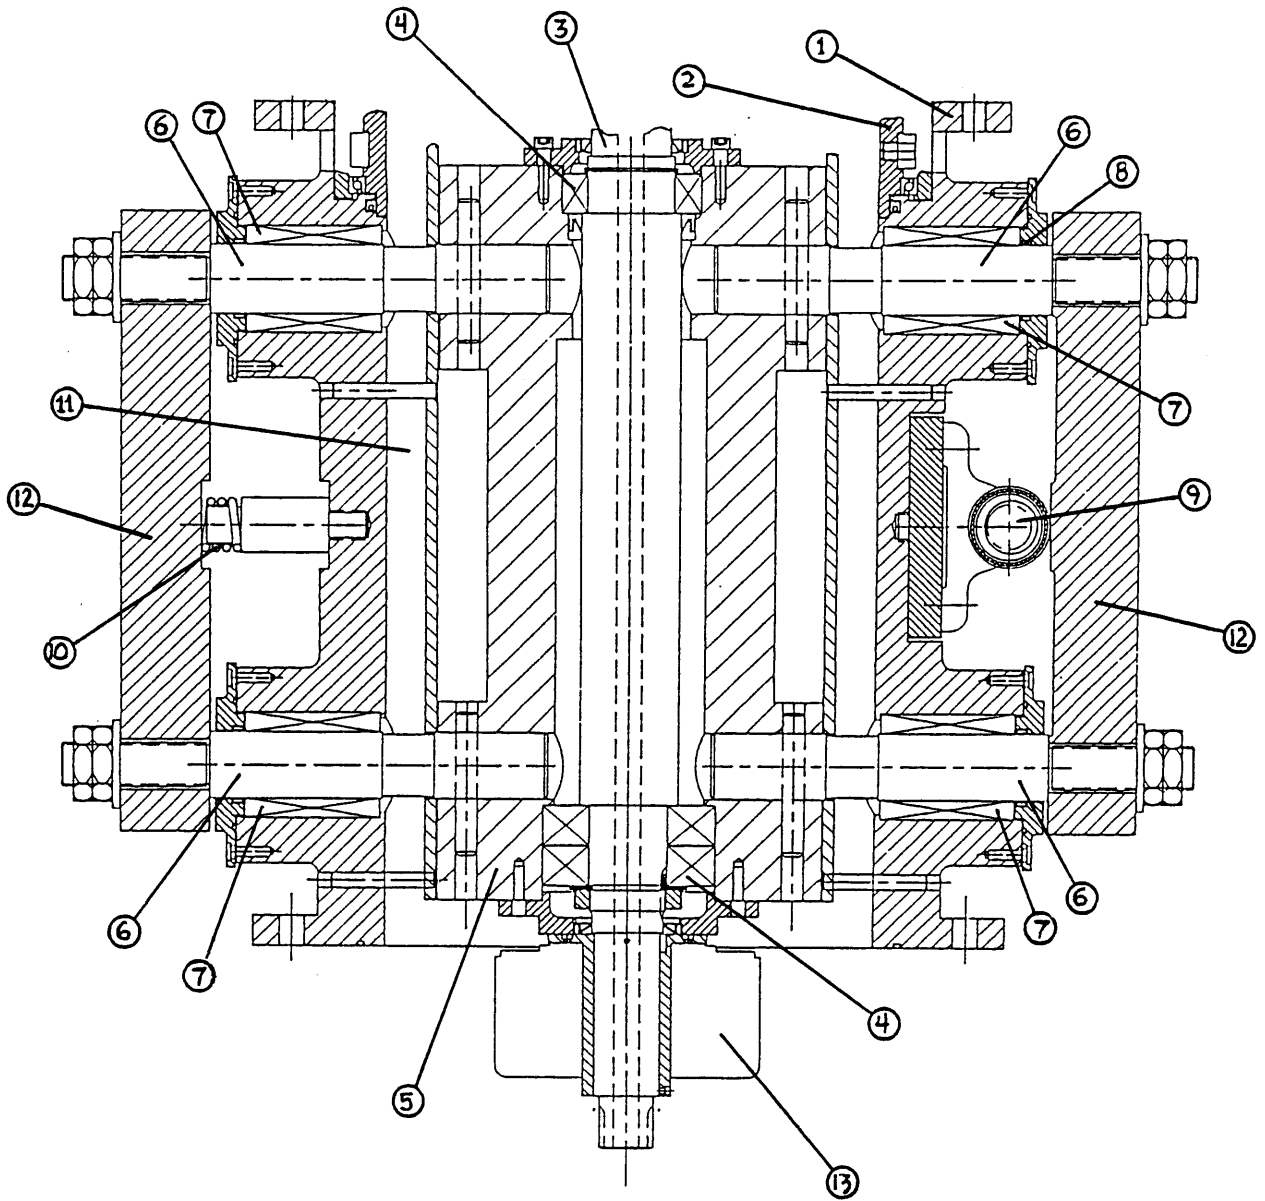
Turbine test section, lower section. (1) Upper flange, (2) Rotatable casing, (3) Upper drive shaft, (4) Upper drive shaft bearings, (5) Bearing housing, (6) Movable struts, (7) Linear bearings, (8) Strut seal, (9) Eccentric cam mechanism, (10) Spring, (11) Flowpath, (12) Strut connecting bars, (13) Optical encoder
